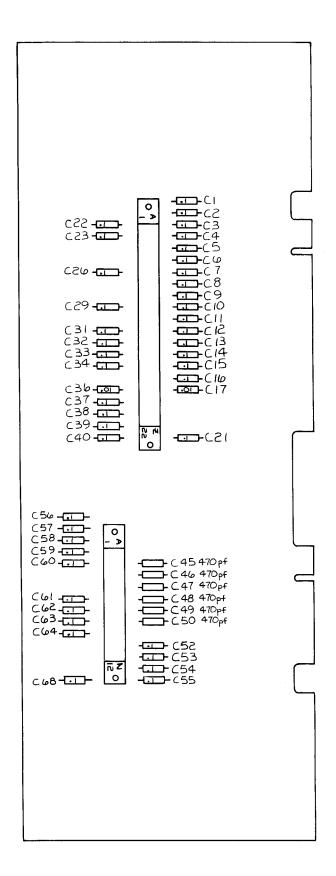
EMI Shield PCB Assembly A040258-01 A
